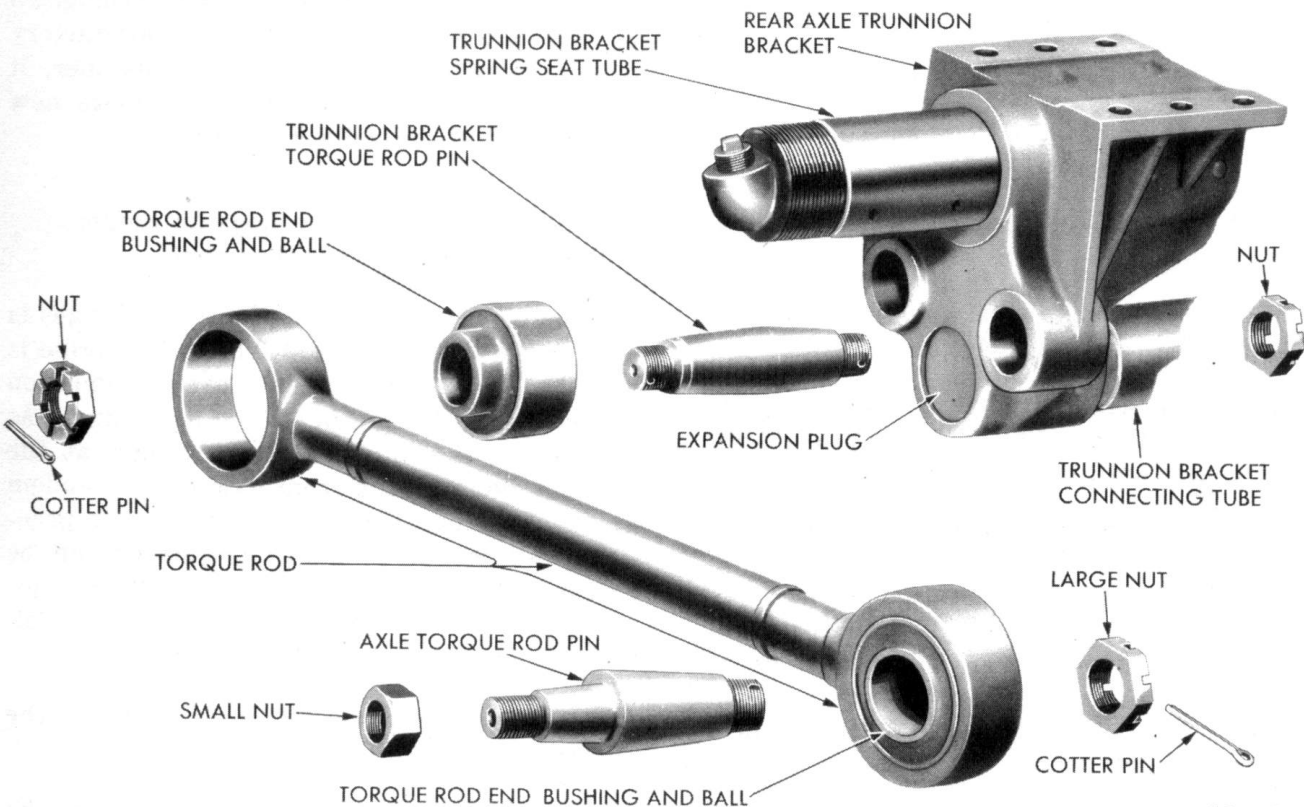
Axle, Lower Torque Rod (Disassembled)
